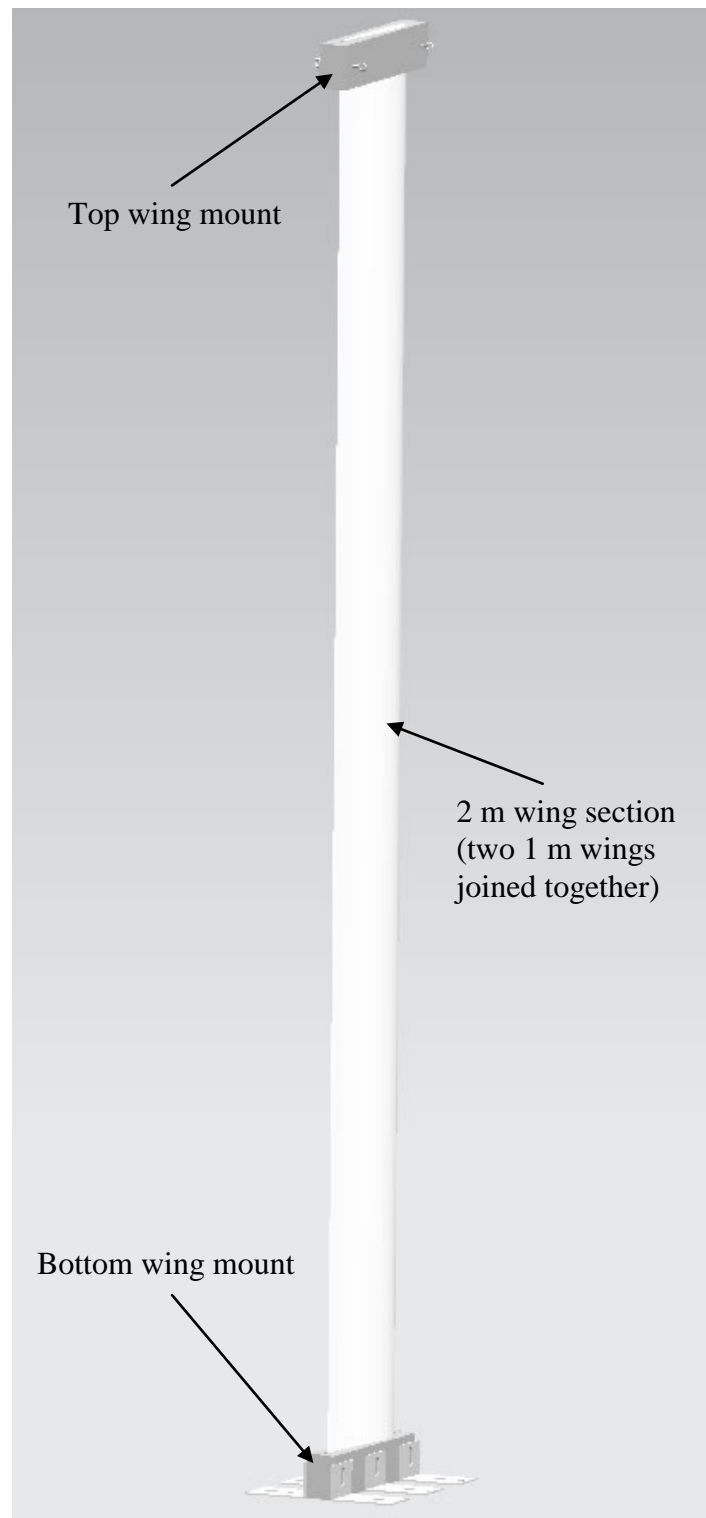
Wing mount assembly (showing 2 wings joined) [20]
